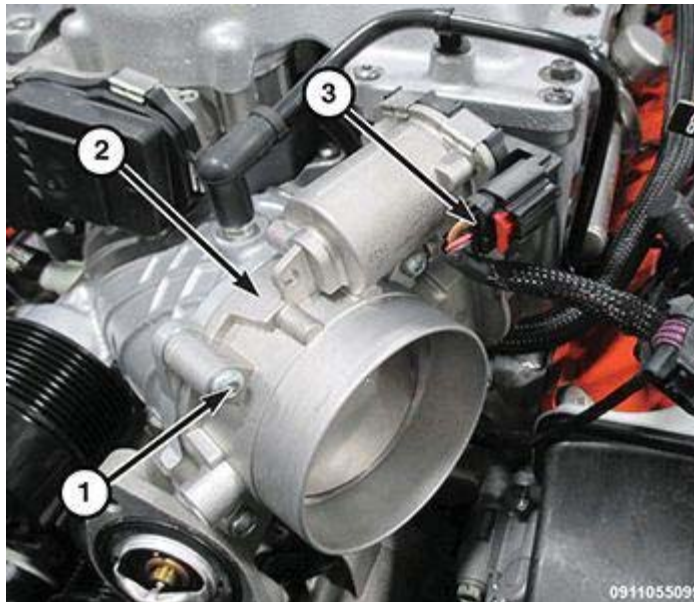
Throttle Body, Throttle Body Mounting Bolts & Electrical Connector
